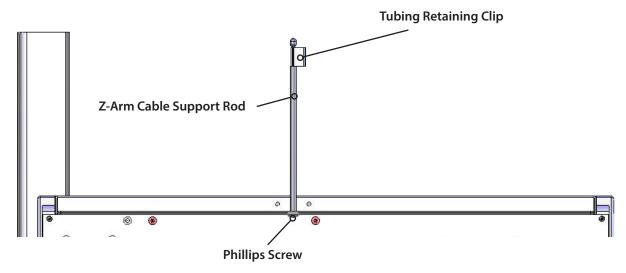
Installing Z-Arm Cable Support Rod (Partial Rear Panel View)
